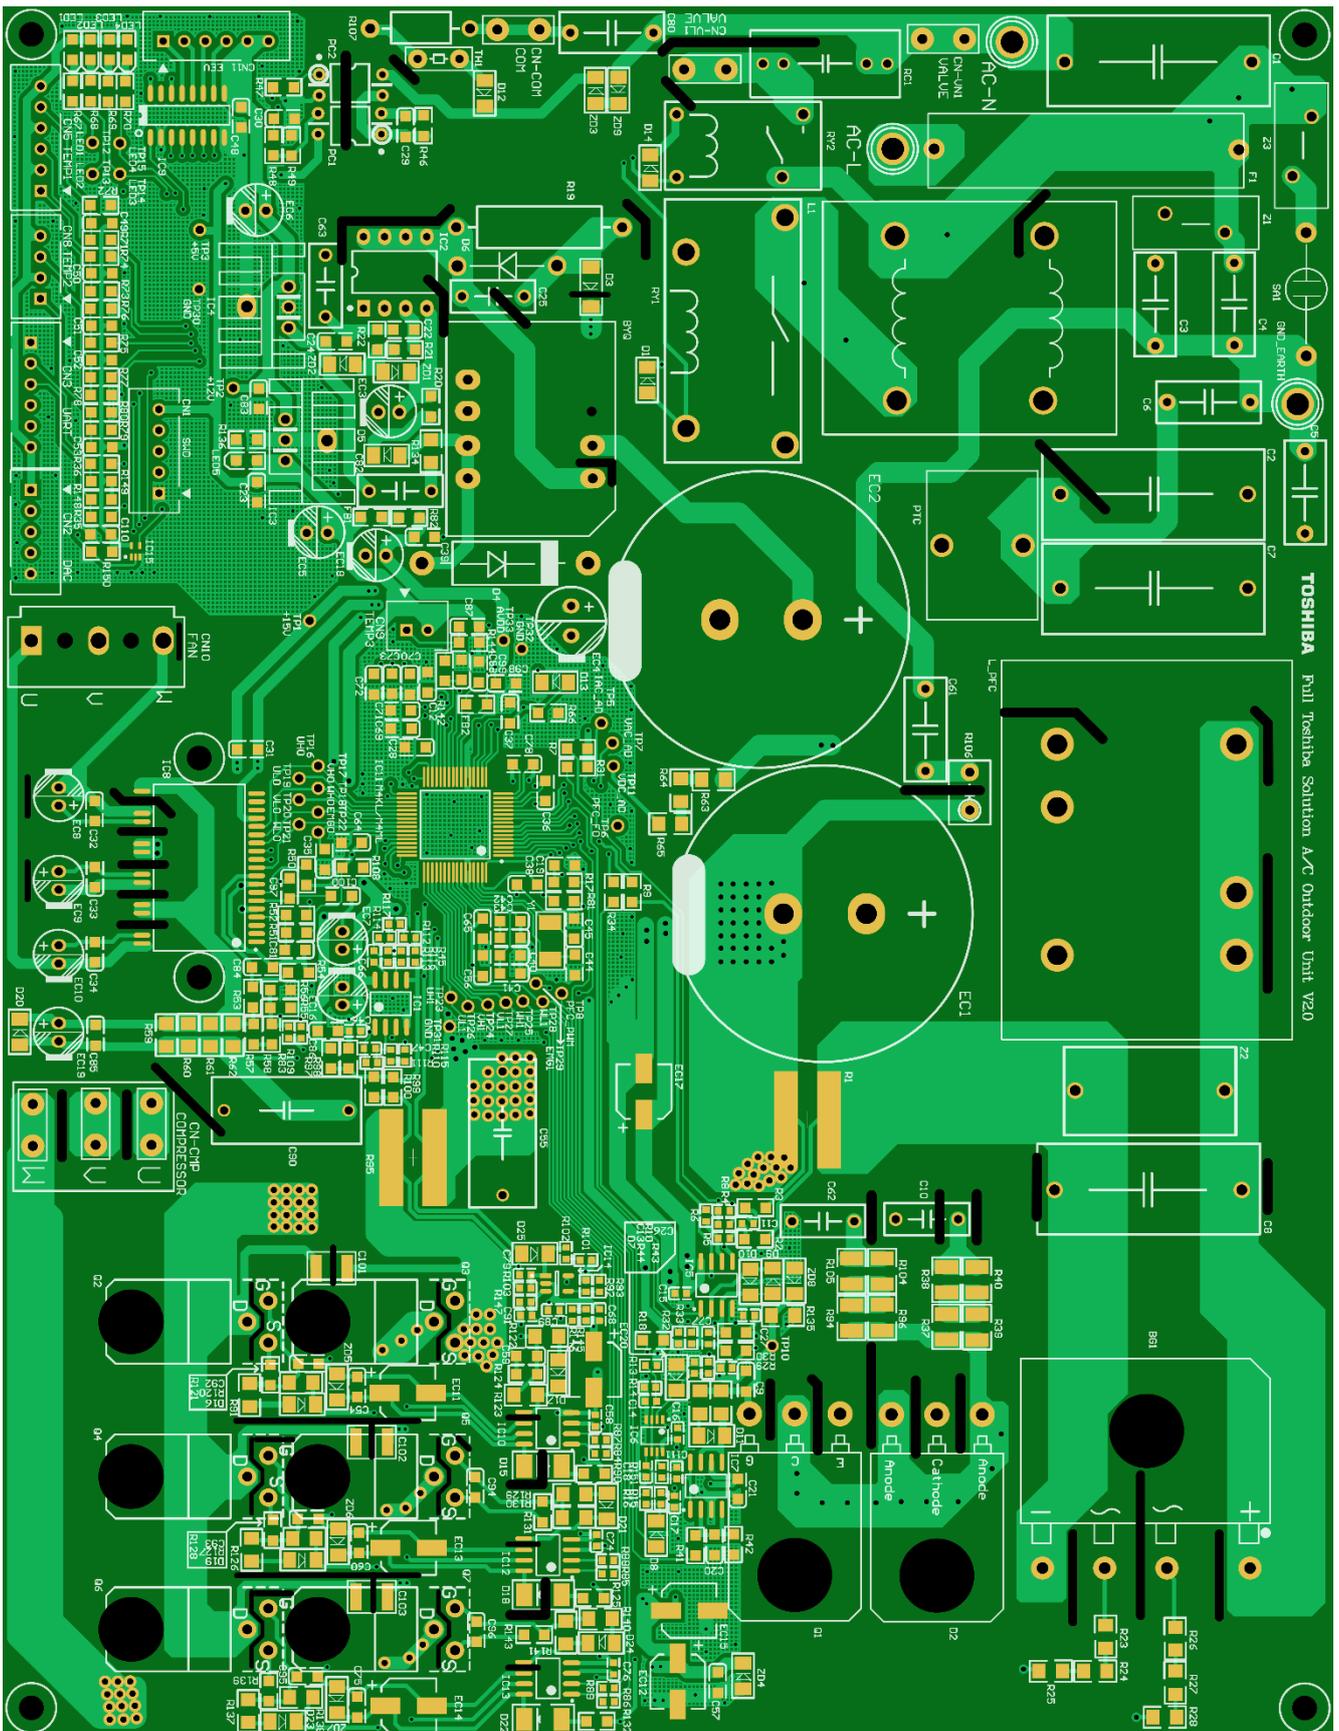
PCB Layout of the Main Components of the Air Conditioner Outdoor Unit Circuit (Top)
